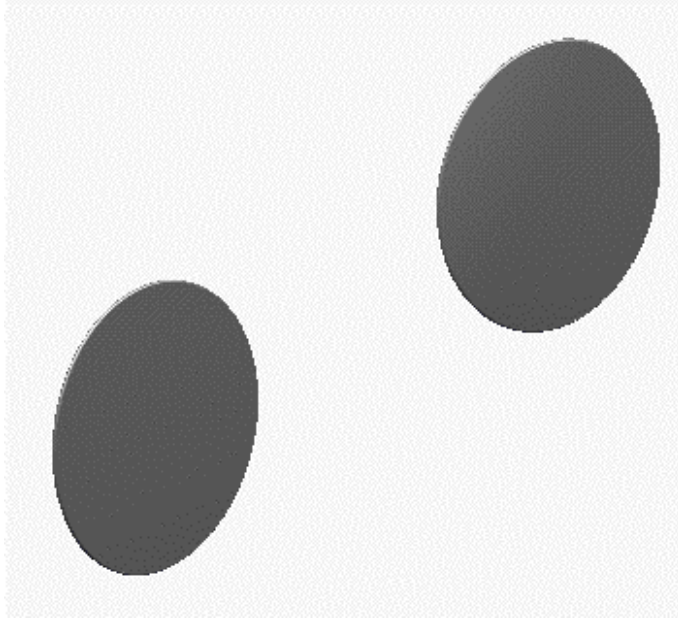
View of C-Class & PNGV-Class fuel filler lids
